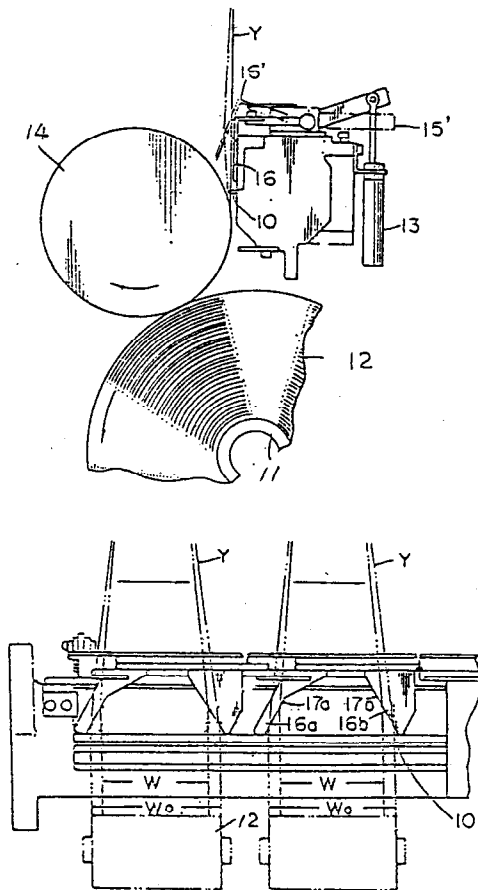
Barrel cam traverse apparatus with the equipment to reduce the saddle of the yarn package. (Top): Side view. (Bottom): Front view
